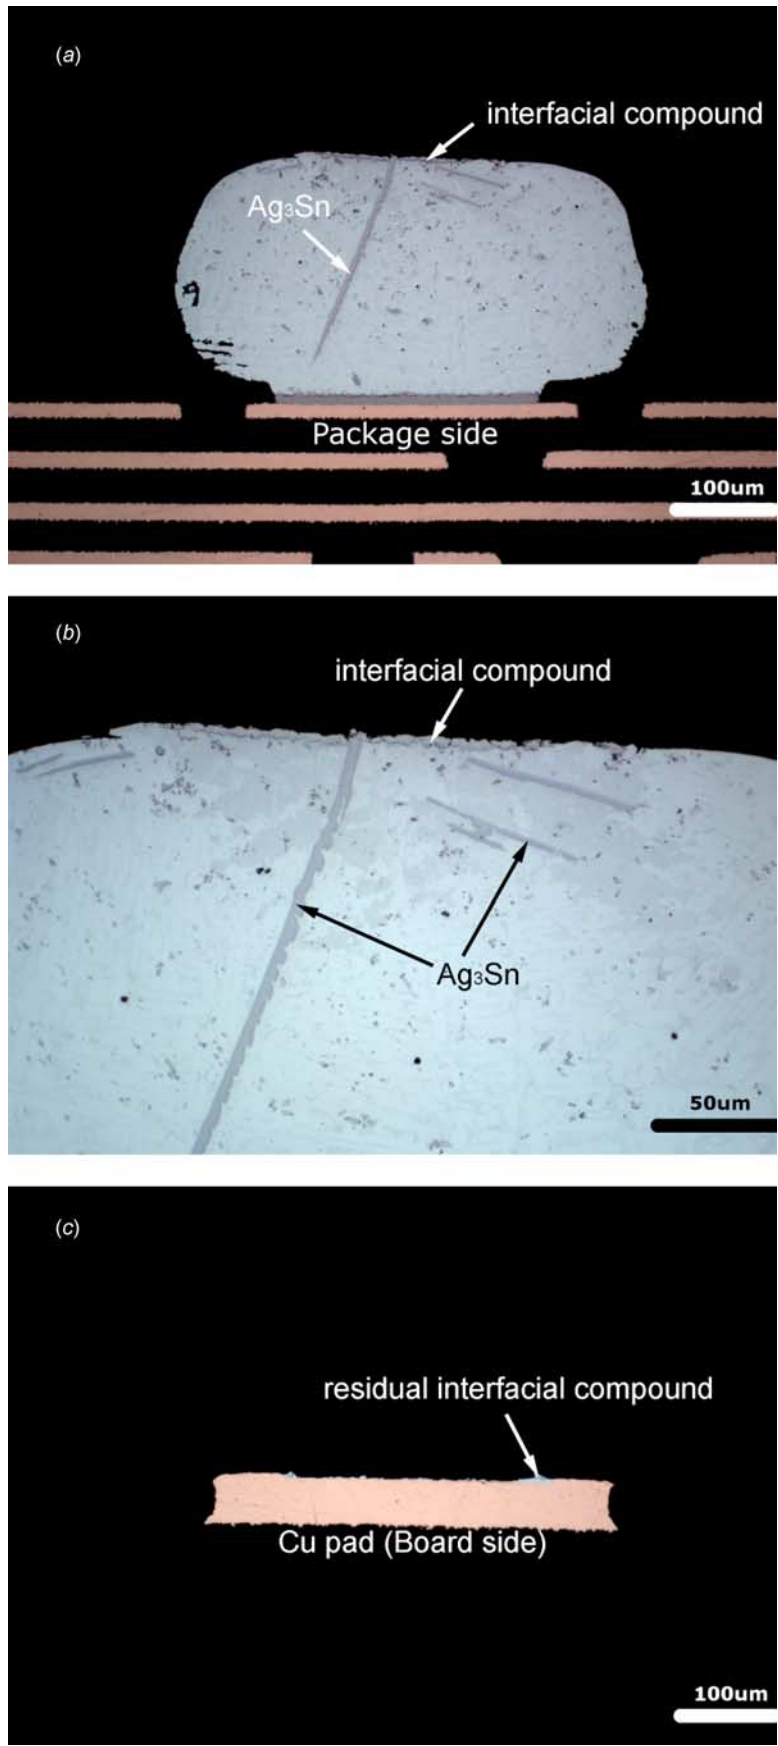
Failure occurs along the IMC/Cu interface at the board side at 0° loading: (a) Solder joint at package side; (b) close-up of the fracture interface; and (c) residue Cu pad at board side.
